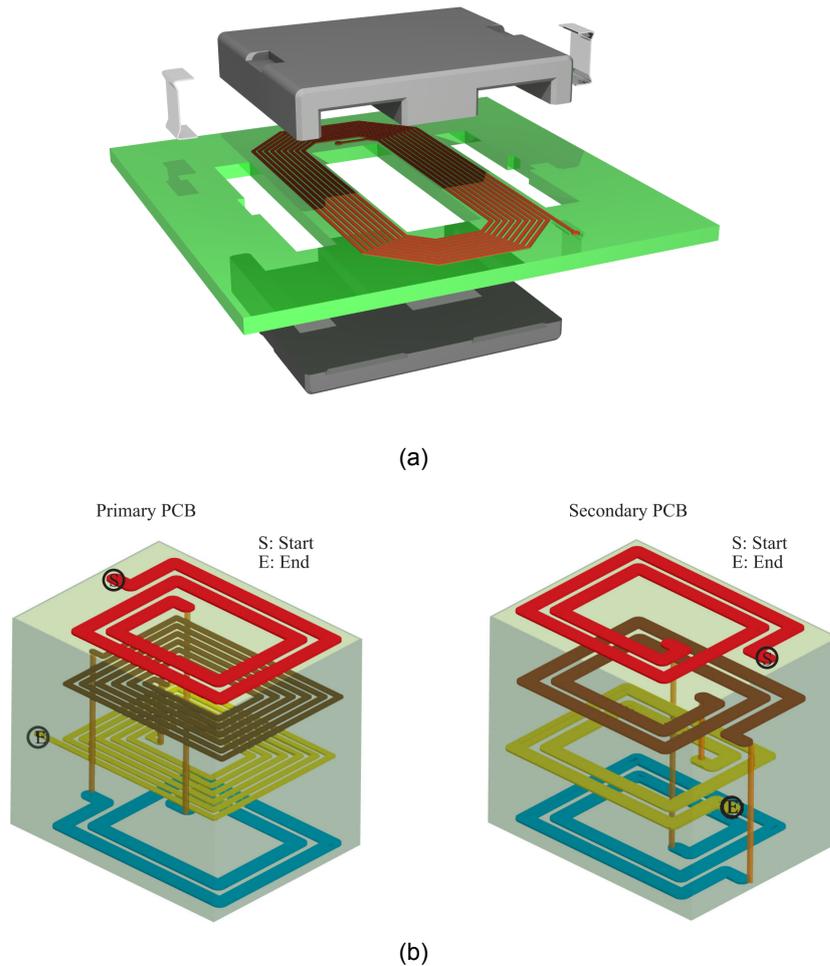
(a) Planar transformer made of multilayer circuit boards. The PCB is located around the smaller-sized ferrite E core. [44] (b) 3D representation of a primary side PCB (left) and secondary side PCB (right) where the start and end of the winding is shown as well as the different winding configuration of each layer. [45]
